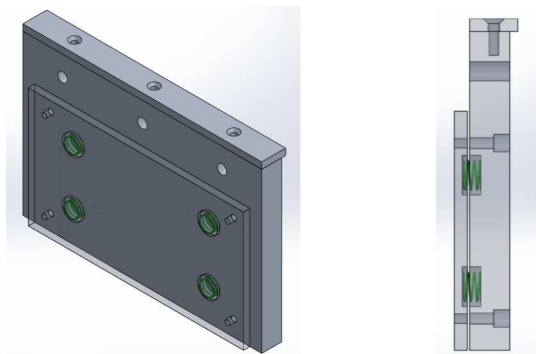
Sprung bearing pad module indicating springs in green. Left: CAD iso view. Right: CAD profile transparent view
